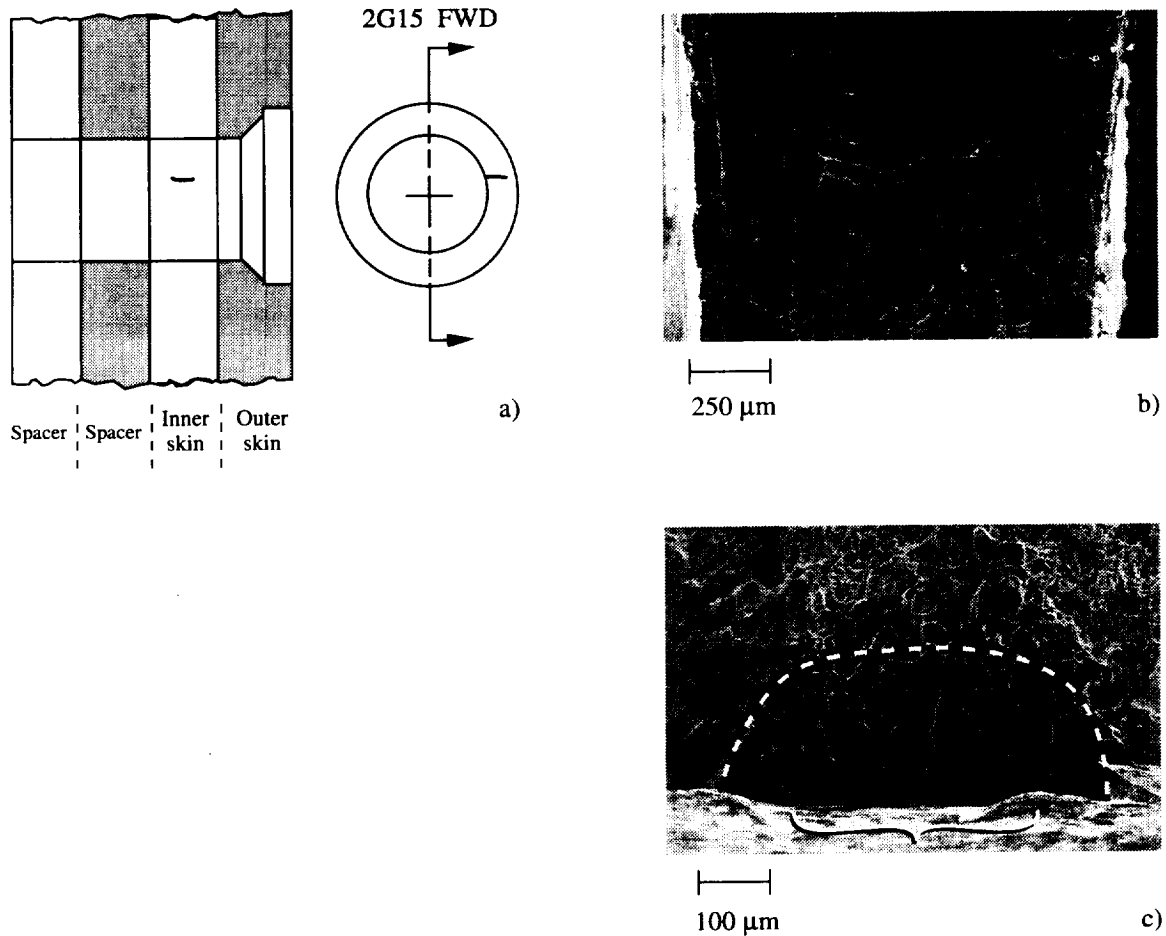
a) The schematic shows the rivet hole 2G15 configuration and the location of the inner skin fatigue crack oriented in the forward direction and above the 3 o'clock position. b) The SEM micrograph shows the partially opened surface crack on the inside diameter of the inner skin rivet hole. The fatigue crack was partially opened by the straining operation prior to breaking the specimen c) The SEM micrograph shows the surface fatigue crack extending from the rivet hole after the specimen was fractured. The dashed line marks the fatigue crack front. The crack initiated at multiple sites along the irregular surface of the rivet hole followed by cracks coalescing to form the single non semicircular fatigue crack. The bracket marks the region of crack initiation.
